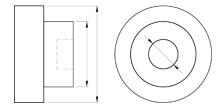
Dimensioning cylinders in rectangular view and holes in circular views
